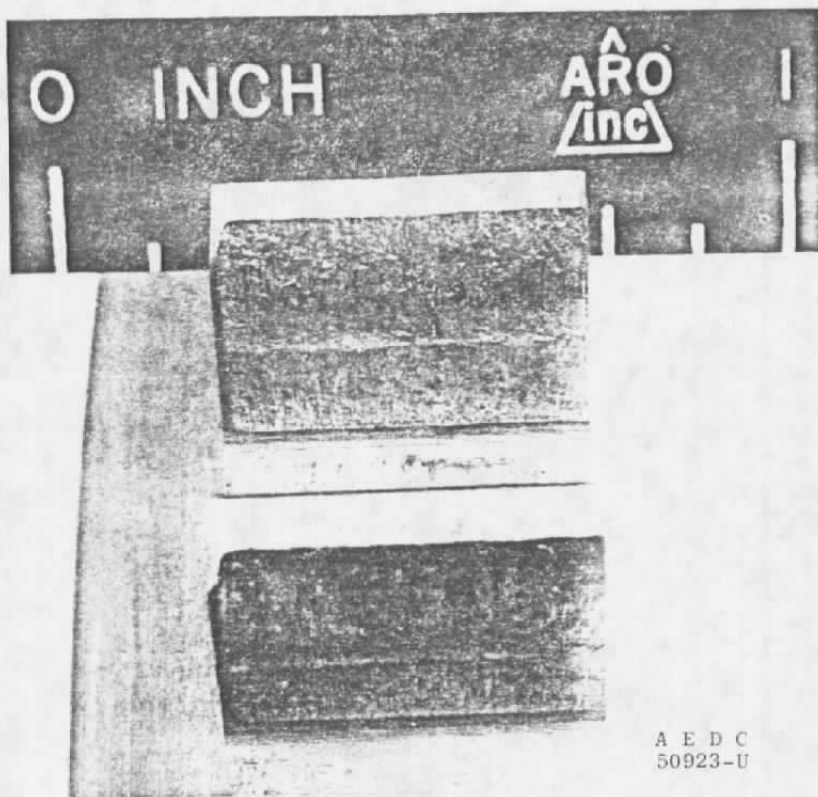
7-D.P. Nodular Iron Grease Lubricated Gears after 40 hr in Test 1
